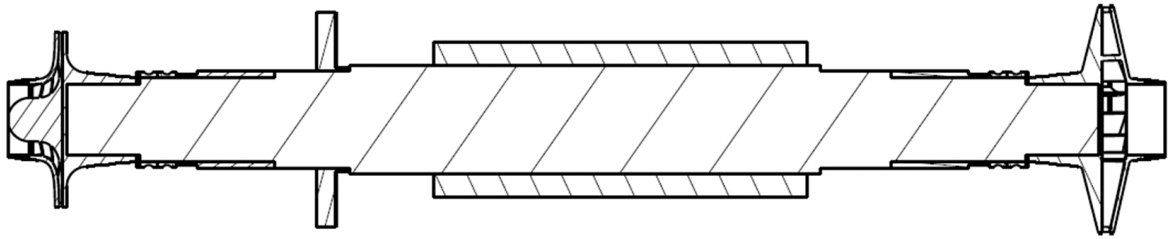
Rotor of the sCO₂-4-NPP turbomachine
